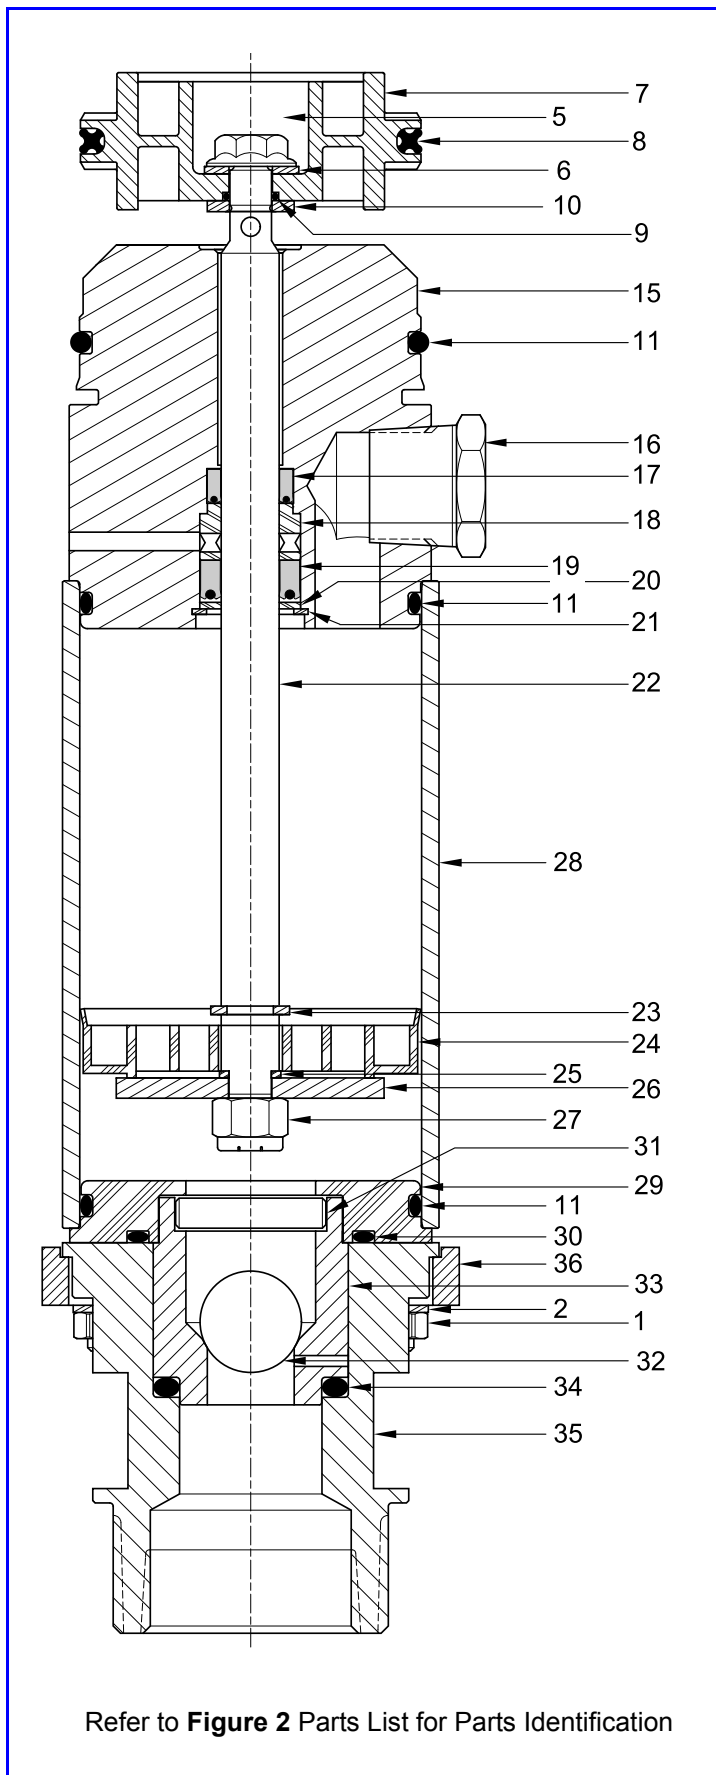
Pump Tube Assembly (w/o Air Motor) - Section View
